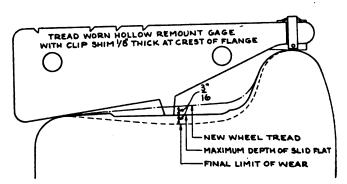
Gages for checking slid-flat cast-iron wheels for grinding
